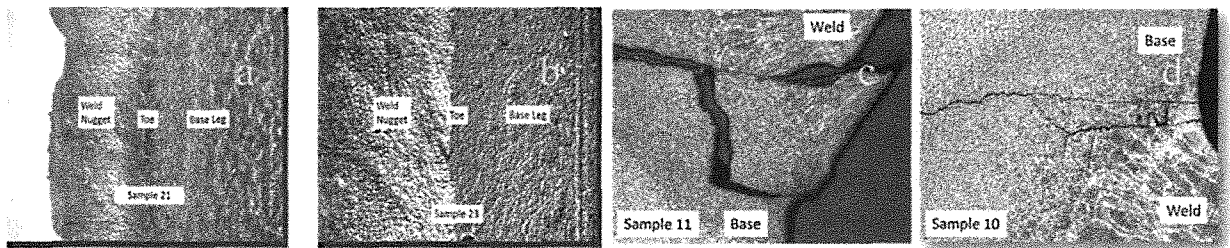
Weld Toe for Sample 21 (211,000 cycle failure), (a). Weld Toe for Sample 23 (Suspended without Failure at 2,000,000 cycles) (b). Hammer Peened Samples 10 and 11 Showing Crack Initiation in Weld Nugget (c, and d)
